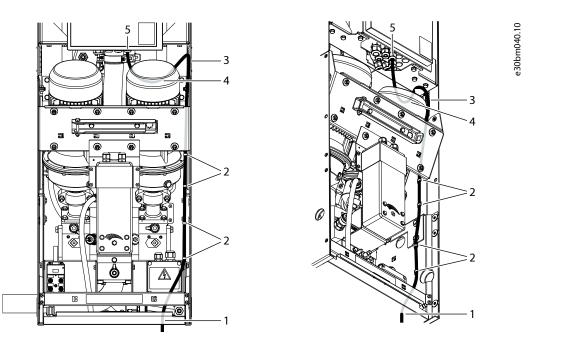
Control Cable Routing of the Cooling Module with 2 Pumps
